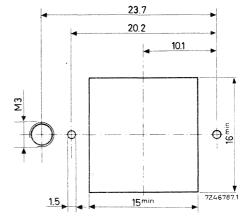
Hole pattern for mounting on a print ed-wiring board (e = 0.1 inch or 2.50)mm)
